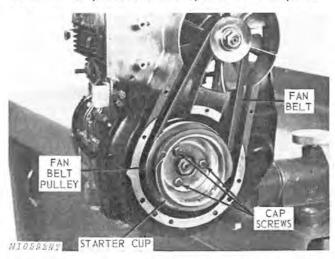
Removing Starter Cup, Fan Belt and Fan Belt Pulley
